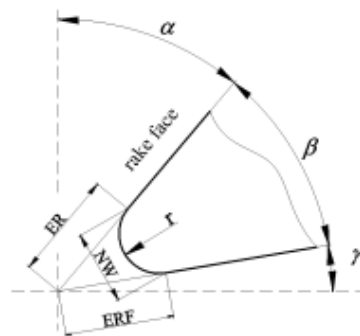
Parameters used to measure tool wear (α = rake angle, β = wedge angle, γ = clearance angle, ER = edge recession in rake face, ERF = edge recession in clearance face, NW = nose width, r = edge radius) [6]
